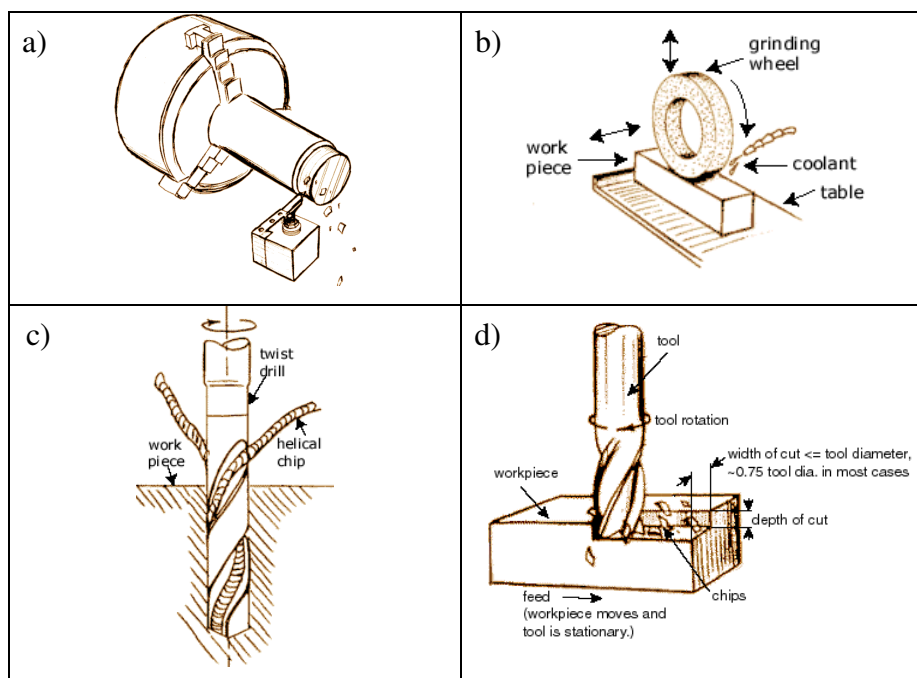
Examples of machining process: a) turning; b) grinding; c) drilling and d) milling.<sup>40</sup>
